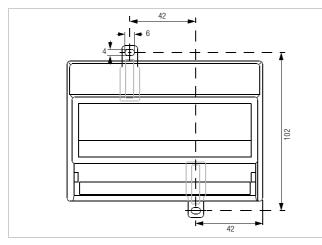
Dimensional Drawing for Wall Mounting (Front View)
